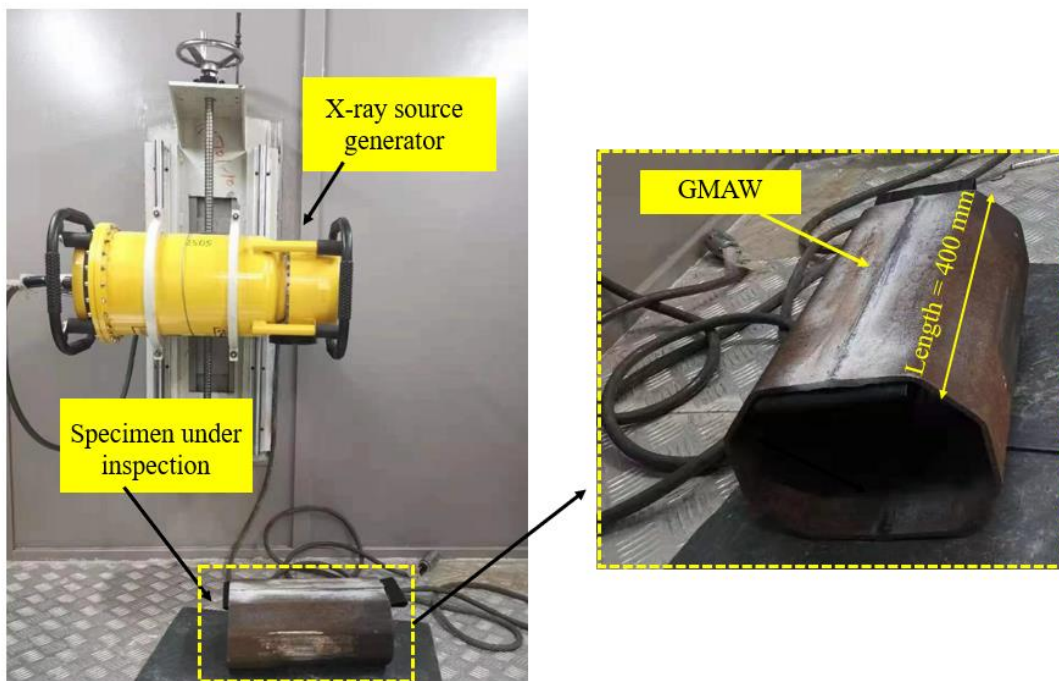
Schematic view of the test set-up of the industrial X-ray inspection for the welding.
